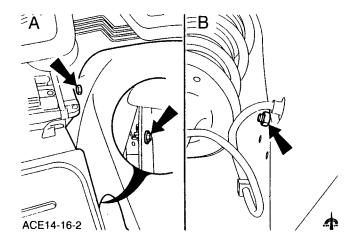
Turbocharger heat shield fixture. (Escort shown)
